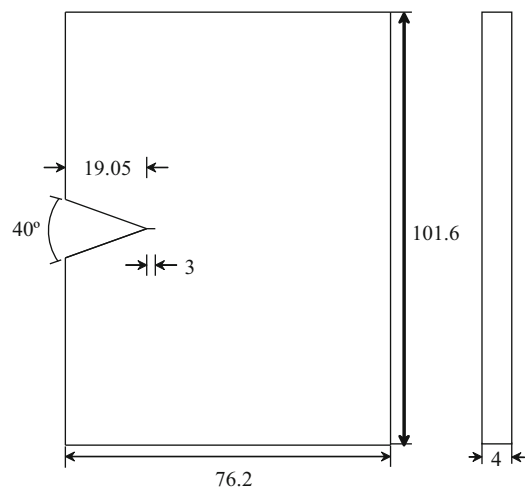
Three-point bend quasi-static fracture test specimen (all dimensions are in mm)
